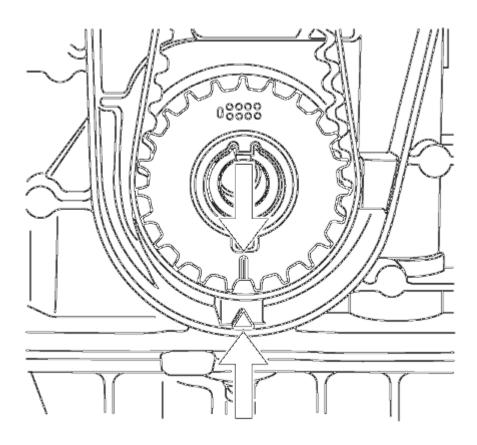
Aligning Timing Belt Drive Gear And Oil Pump Housing Courtesy of GENERAL MOTORS COMPANY
